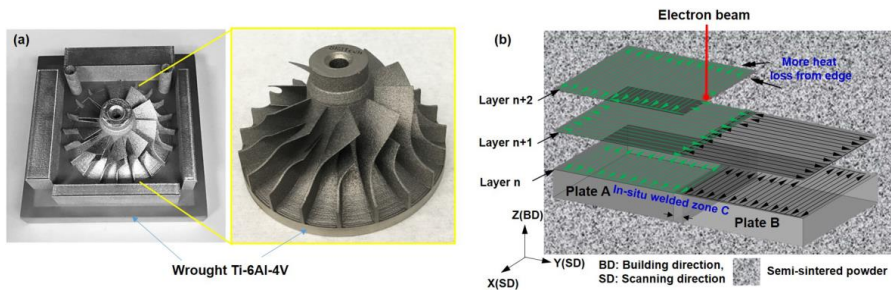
Illustration for (a) hybrid fabrication and (b) in situ welding.
